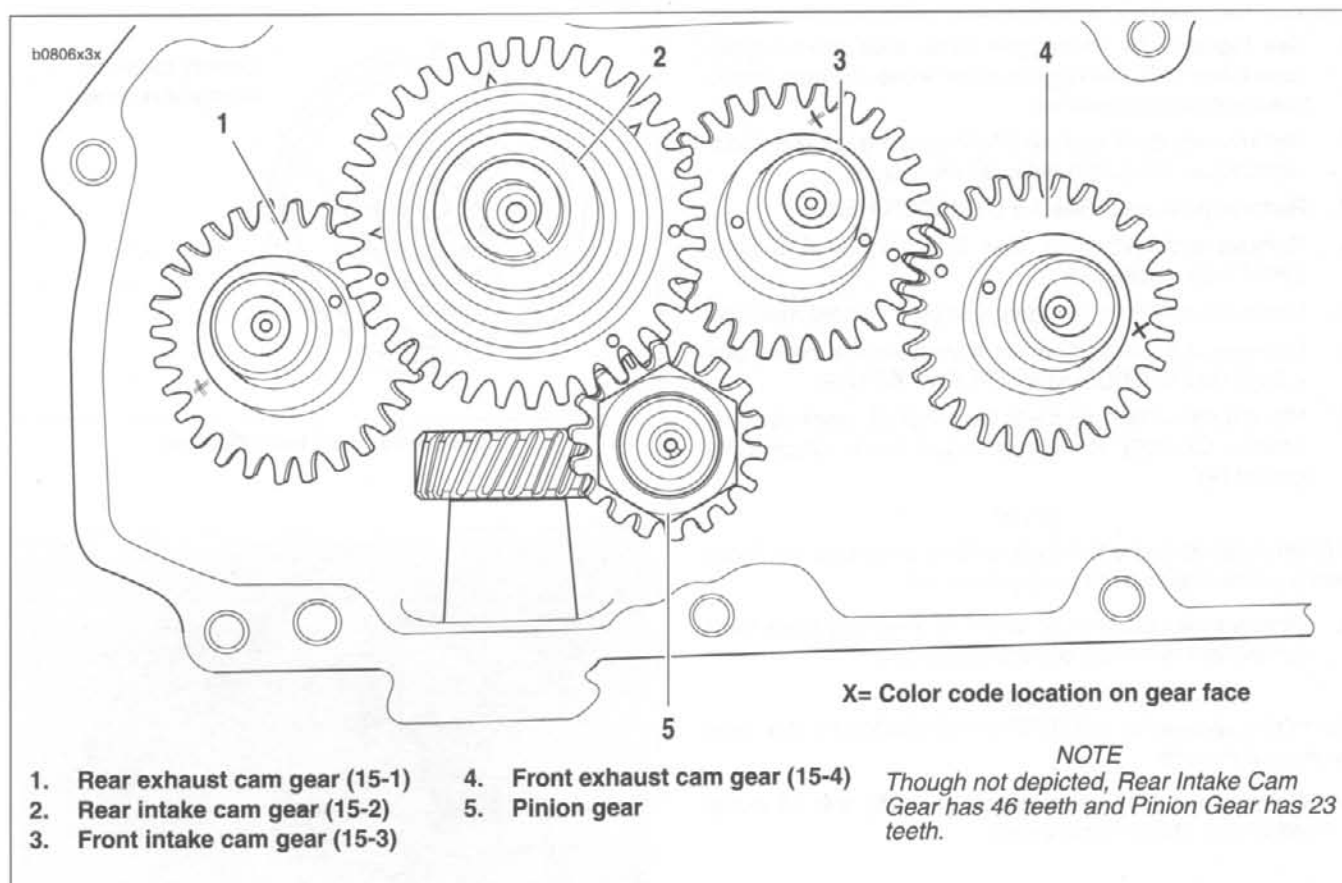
Cam and Pinion Gear Color Code Location and Timing Mark Indexing
